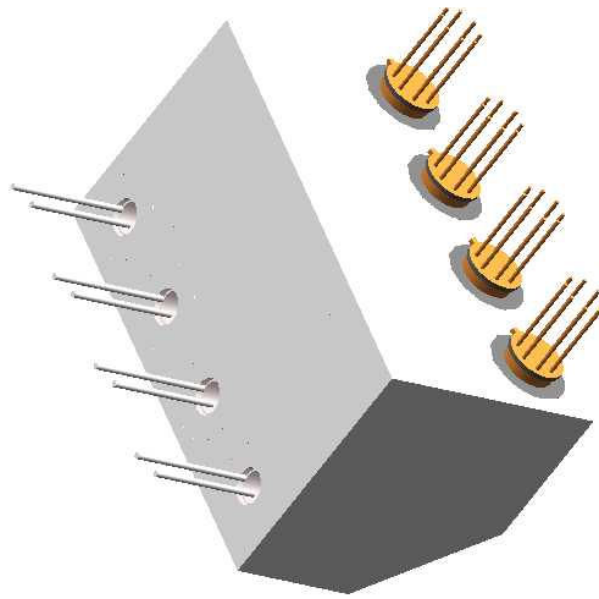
Labelled exploded view of the single channel detector holder
